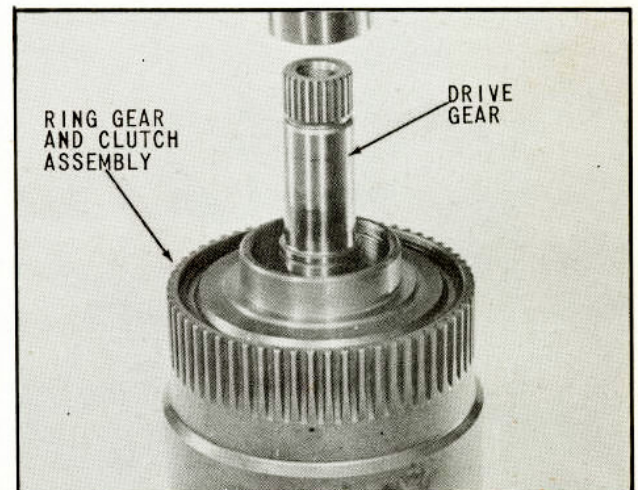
Assembling Ring Gear and Clutch Assembly on Drive Gear
